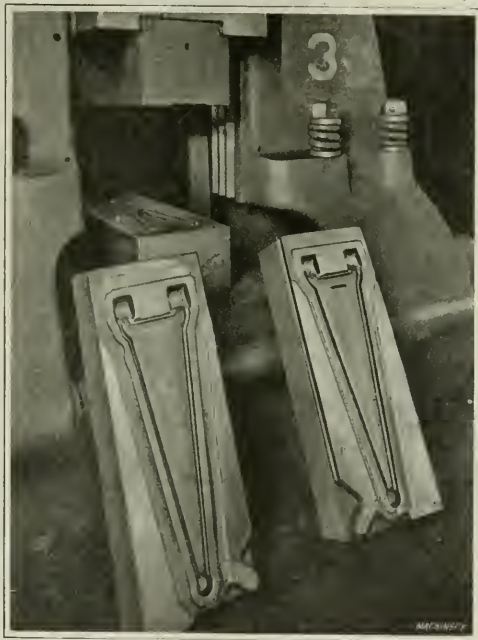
Steam Drop-hammer and Dies for producing the Torque Arm in Fig. 7
